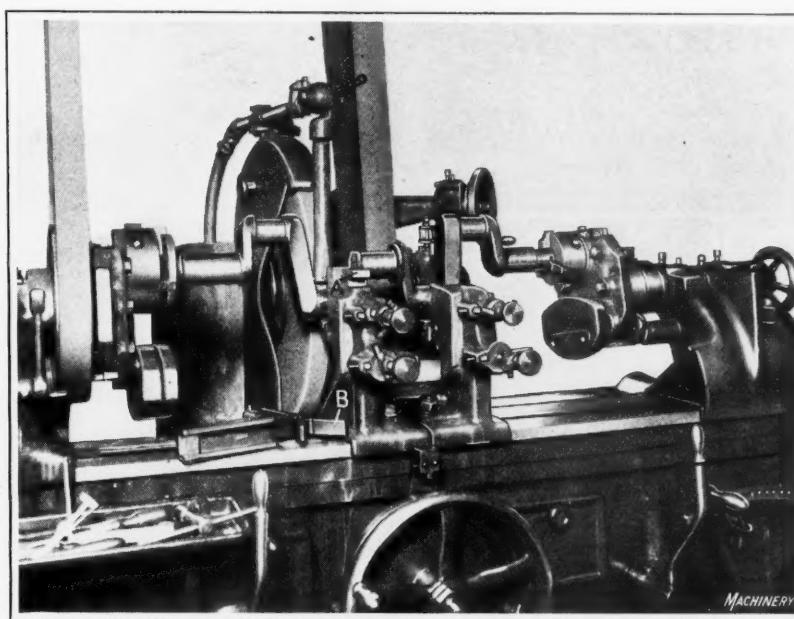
Crankshaft Regrinding Machine set up for refinishing Crankpin Bearings on a Four-throw Crankshaft
